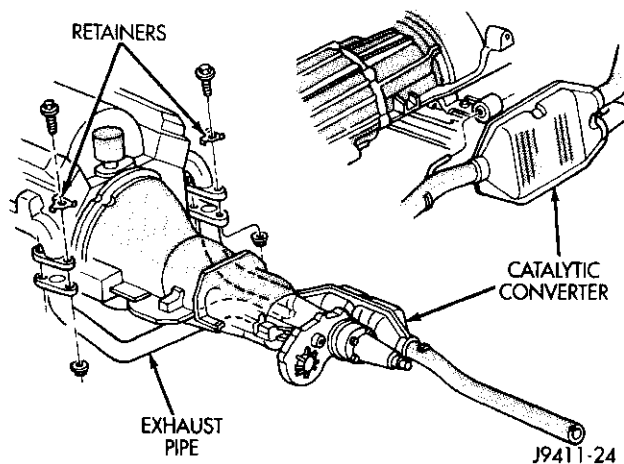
Exhaust Pipe—3.9/5.2/5.9L (Light Duty)
